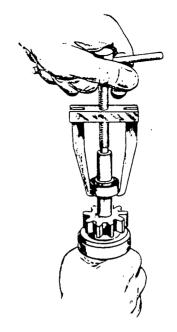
MOUNTING OVERRUNNING CLUTCH
